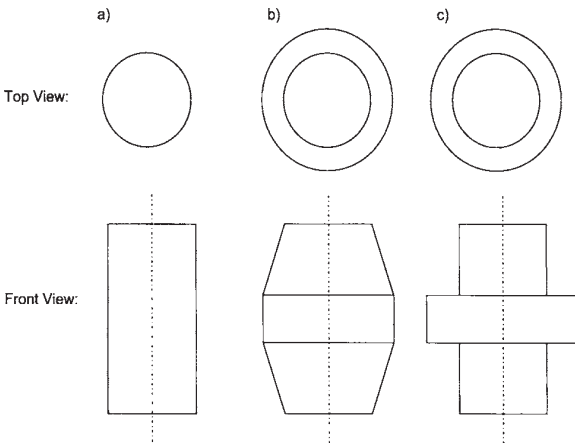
Schematics of compression test specimen geometries: (a) cylindrical sample; (b) tapered sample; and (c) flanged sample. (From Ref. 10.)
